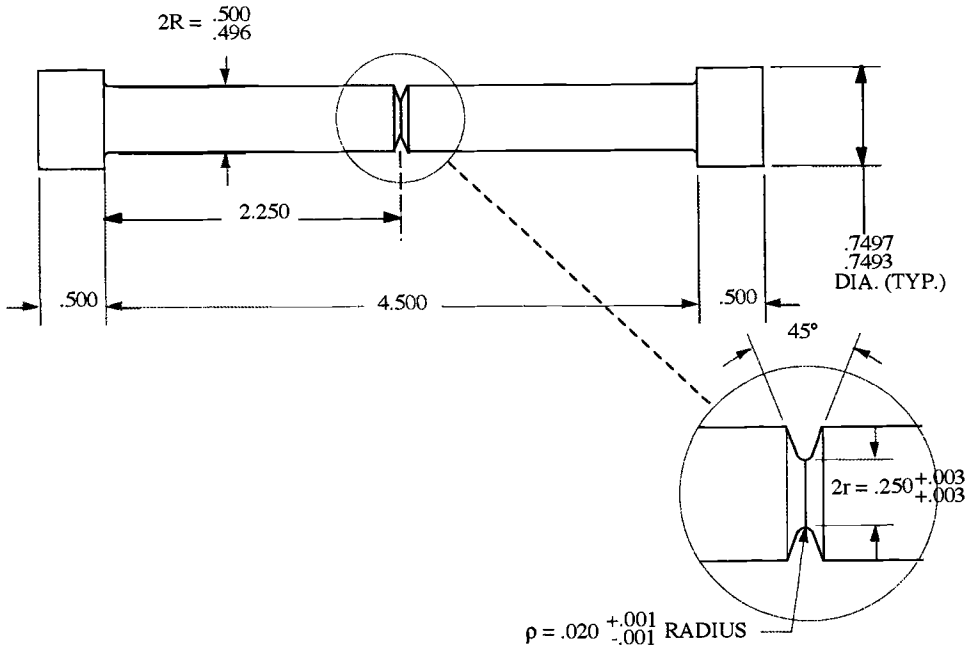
Engineering drawing of the notched round bar specimen (1 in. = 25.4 mm).
